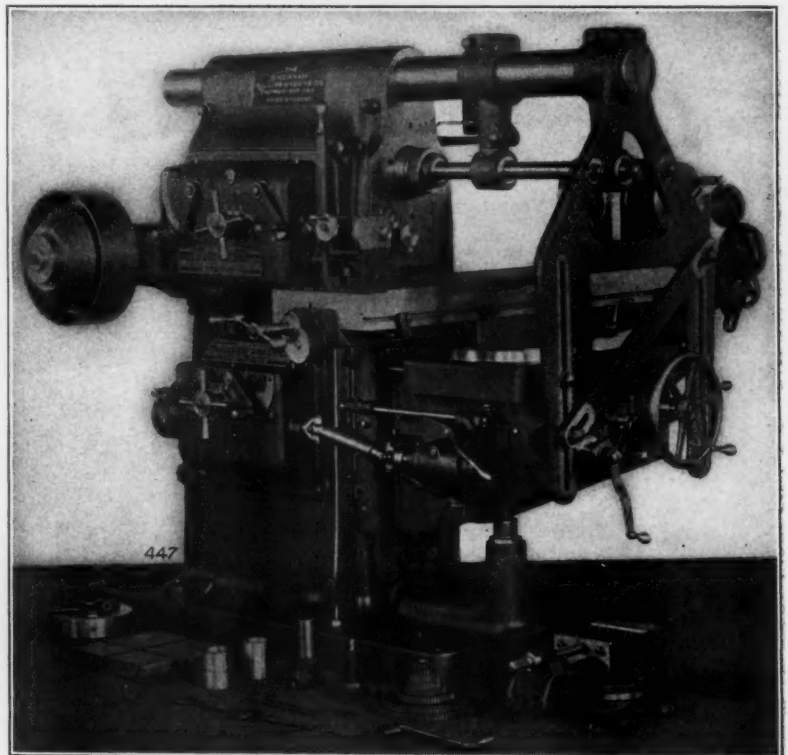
PLAIN HORIZONTAL MILLING MACHINE WITH RIGHT-ANGLE DRIVE.
